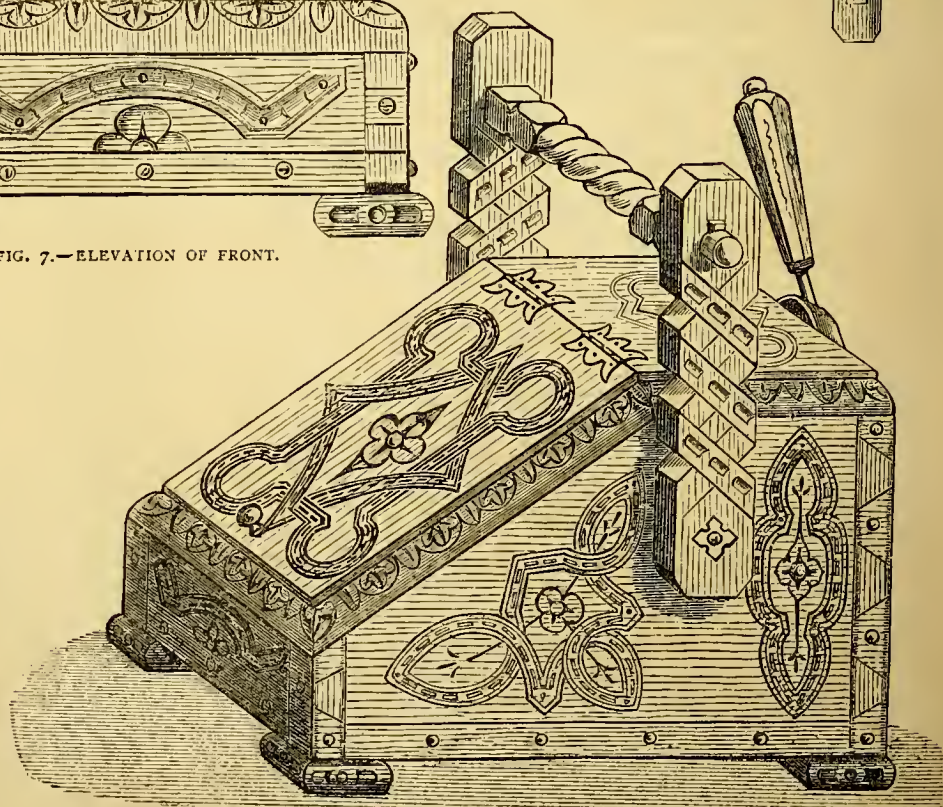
COAL-SCUTTLE IN CARVED OAK. PERSPECTIVE VIEW.
